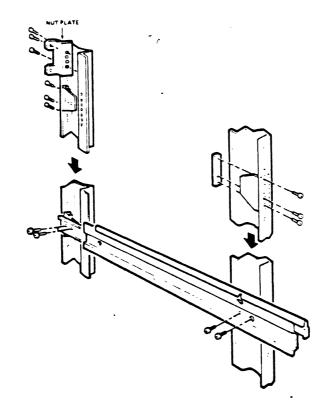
MOUNTING CHASSIS SLIDE AND RESTRAINT BRACKET
